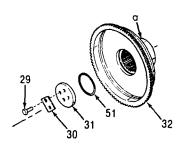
Fold-out 14 Left-output drive assembly exploded view
